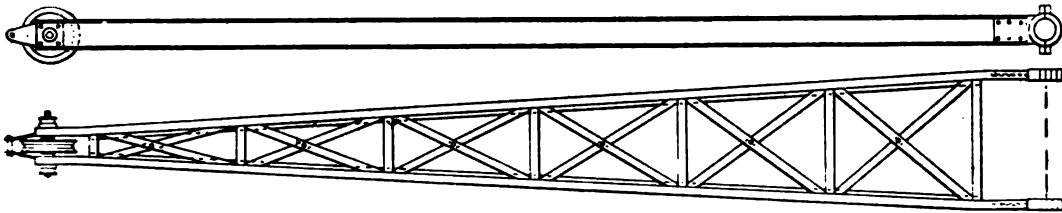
Jib formed of Rolled Sections and Bracing.
